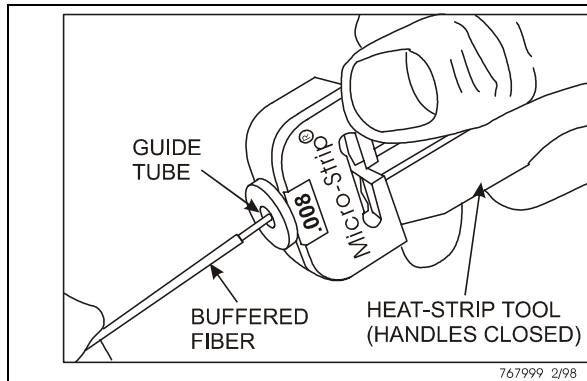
Heat-Strip Tool - Removing Fiber Coating from Buffered Fiber
